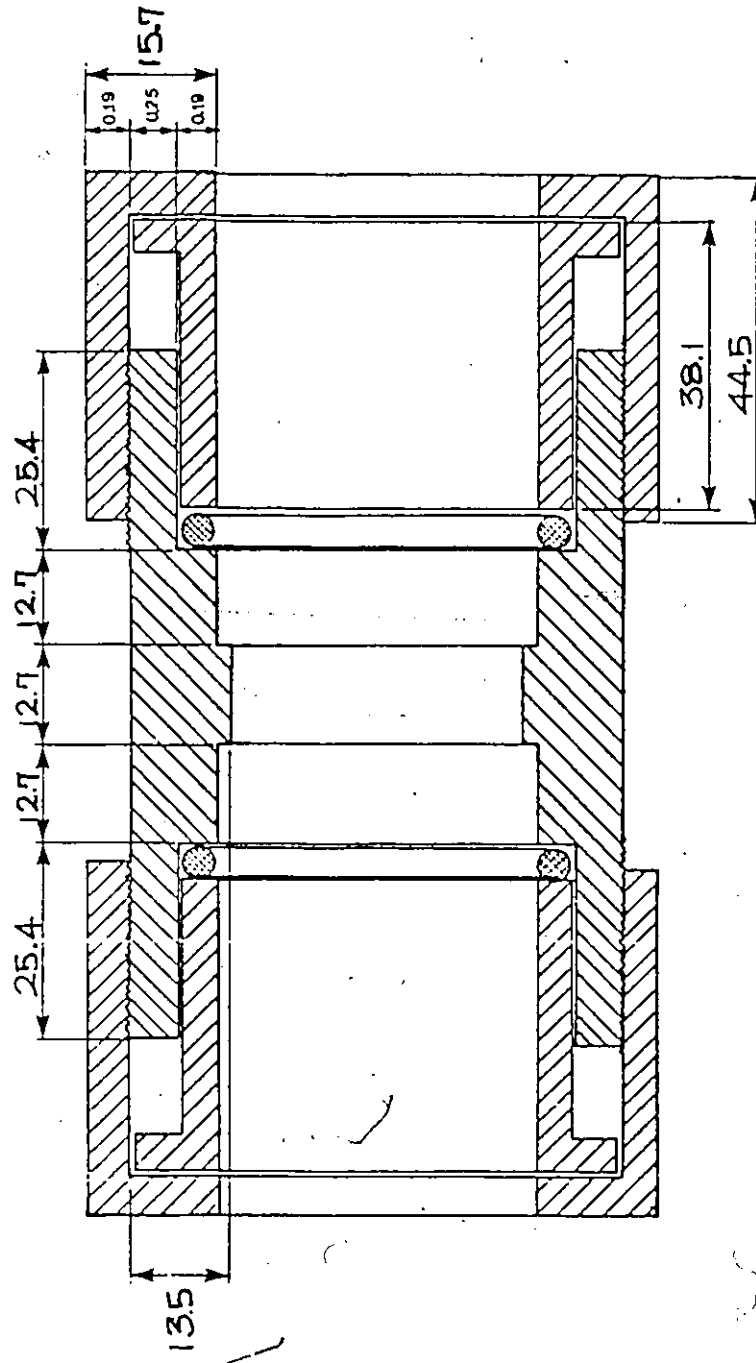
Connector Assembly, Middle Section, Concentric Annulus
